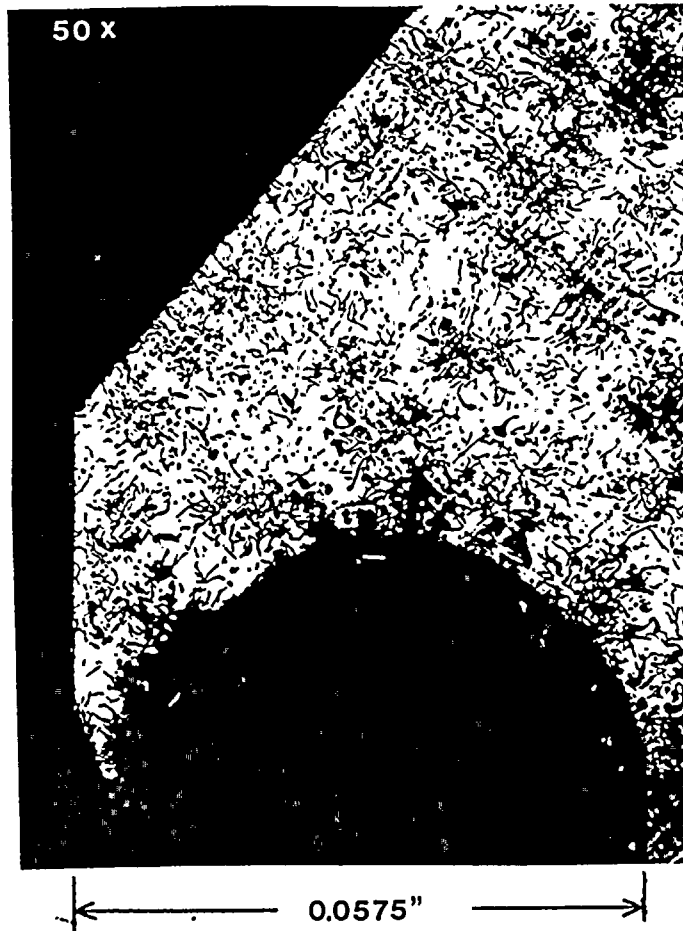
Picture of oil ring profile at high magnification. To be taken later. Magnified image of oil ring finger from B diesel, 7L piston lower oil ring showing structure deformation and size of the finger.
